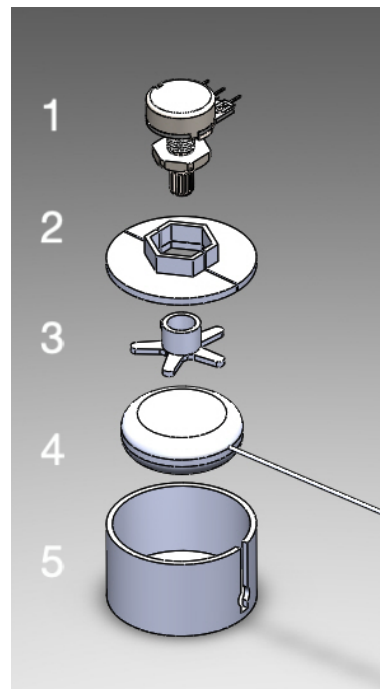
Exploded view of the developed distance sensor (the stringpot); (1) potentiometer, (2) lid, (3) attachment piece, (4) key-retractor (schematic drawing), (5) box.
